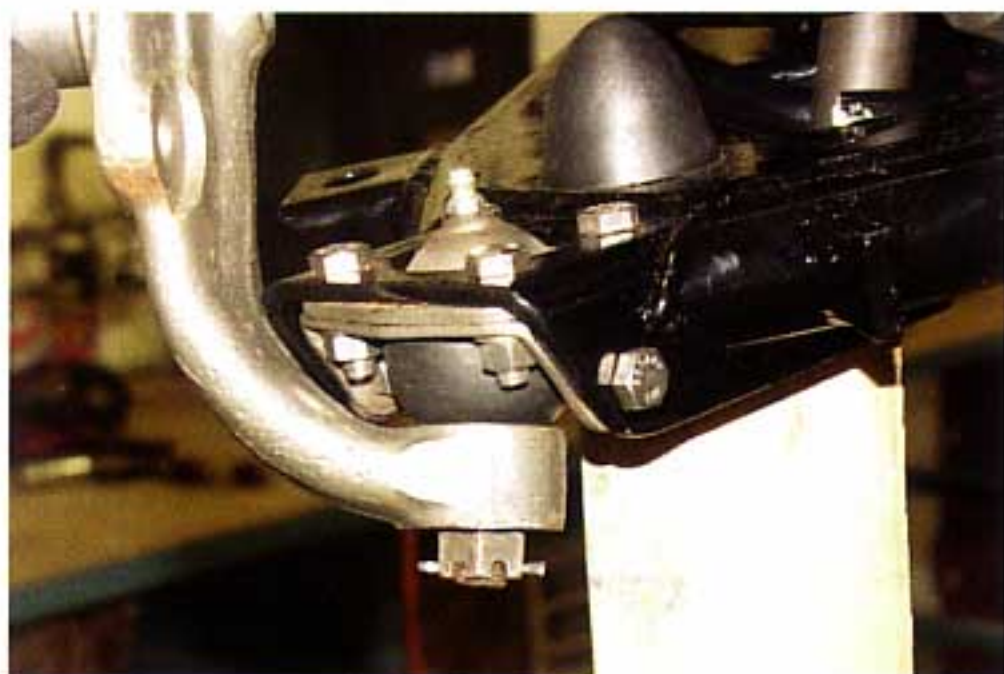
With the new lower arm in place, attach the spindle to the lower ball joint and torque the ball joint nut to 55 ft/lbs. Install a new cotter pin.
